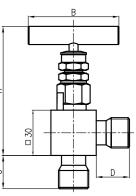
STRAIGHT-WAY VALVE WITH INNER THREADS 967 31 .., dimensional drawing, scheme, application
